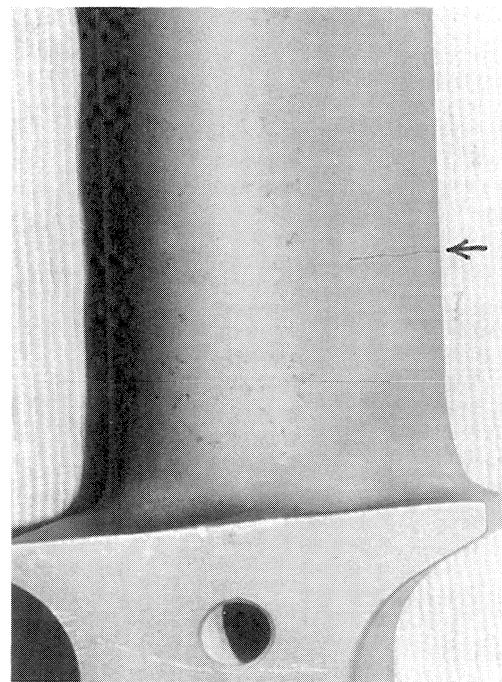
Blade Showing a Mid-Span Fatigue Crack.
